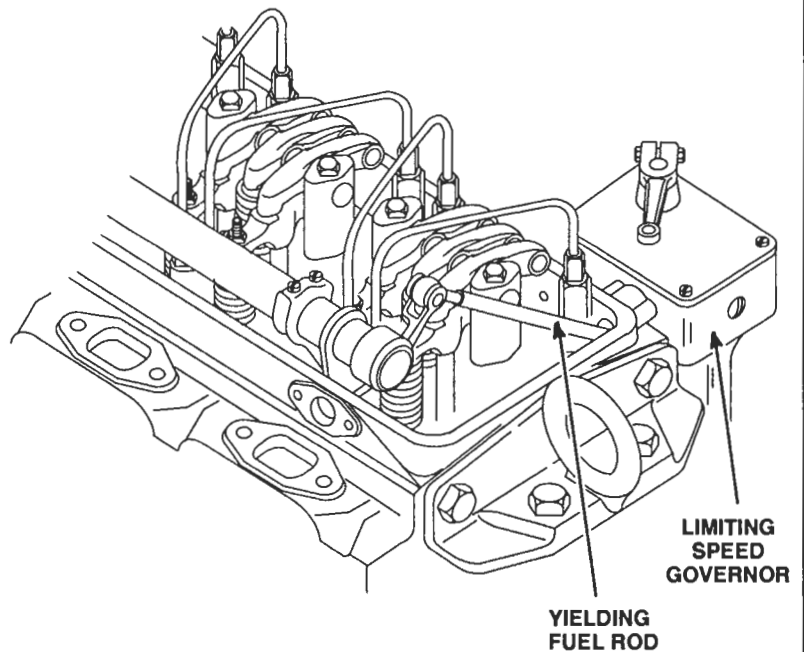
Yielding Fuel Rod used with Limiting-Speed Governor
